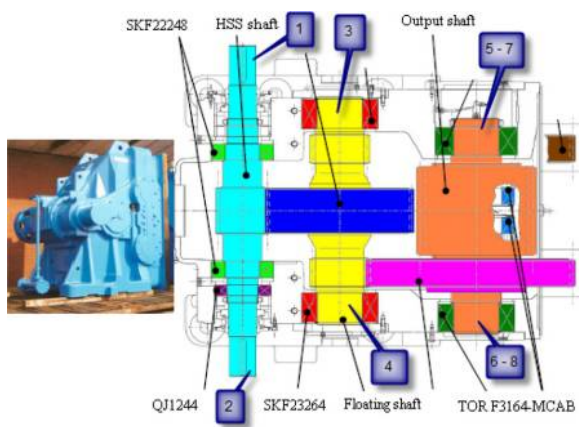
shows the gear unit Flender DMGH25.4, which is driven by a main motor through elastic coupling RUPLEX RLS 800. To move the grinder on a desired position, the gear unit is connected to a tacking with a motor (auxiliary motor) and a brake capable of blocking the grinder on any position. The kinematic characteristics of the gear unit are as follows (Manual, 1999):
